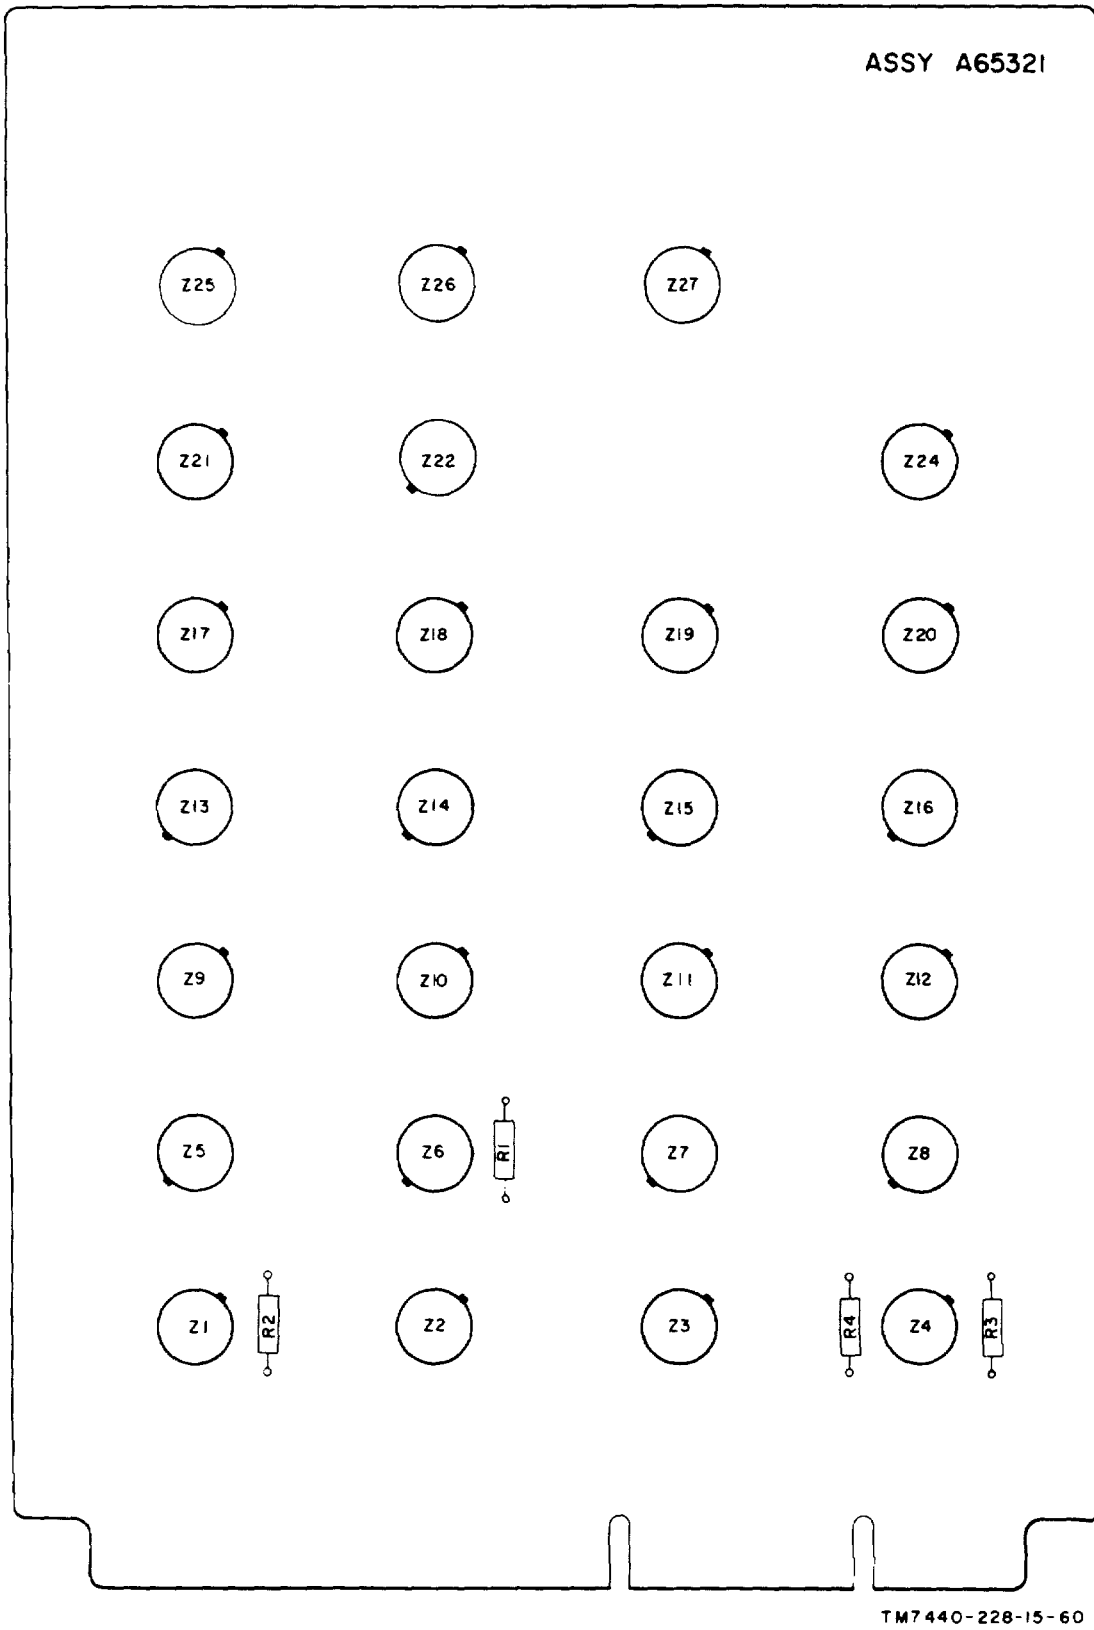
PC card A8 (No. A65321-001), component location diagram.
